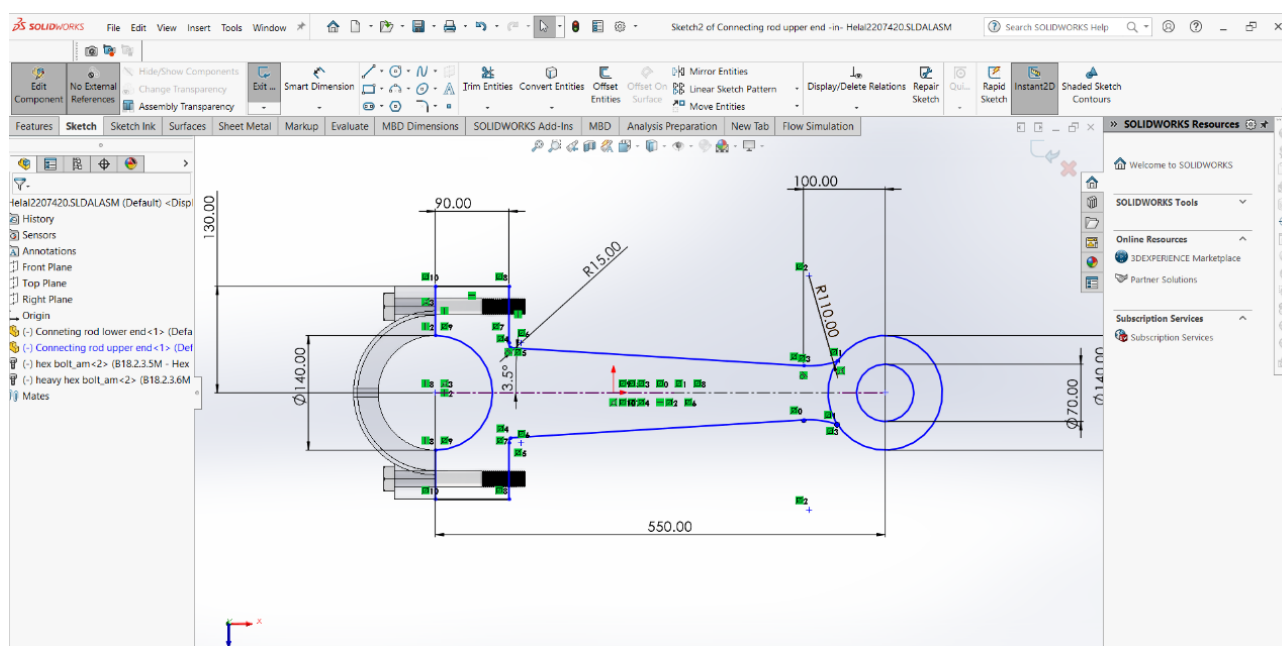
2D Drafting and Dimensions of the Connecting Rod.
